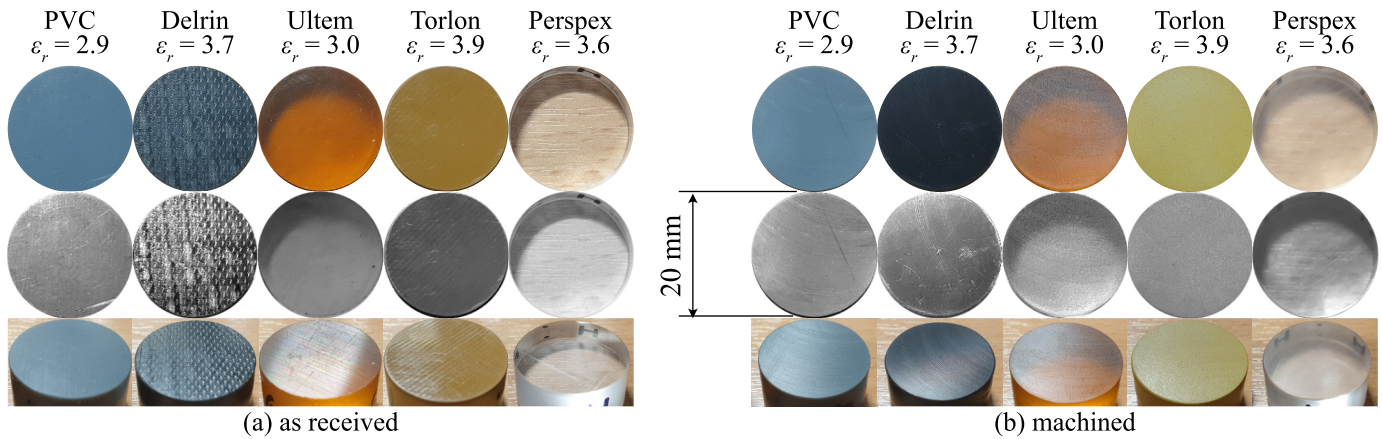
Photographs and contrast/brightness adjusted photographs of representative sample surfaces used in this work for (a) “as received”, (b) “machined” surfaces with a thin surface layer removed. Brightness and contrast adjusted photographs have been provided as they make the surface features more apparent on some digital displays and in print, for ease of viewing. Note that Perspex has high optical clarity, preventing the surface texture to be easily captured on camera. The wood grain visible in the photograph is that of the table underneath.
